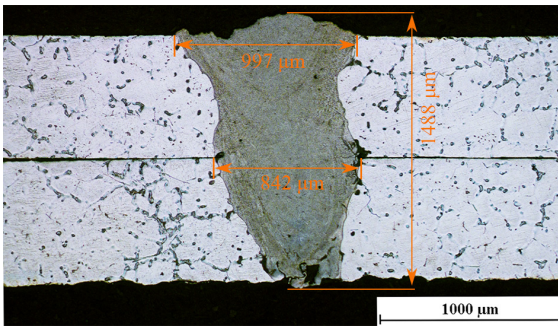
The cross-sectional morphology of the welded joint.
